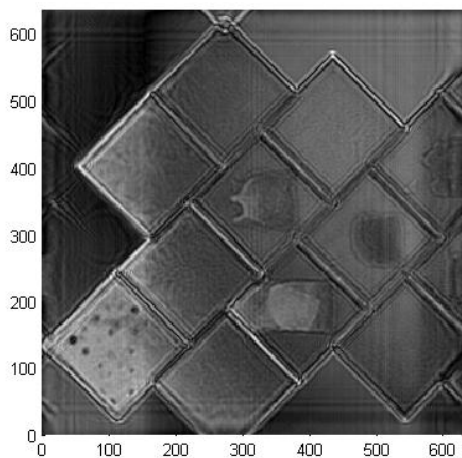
Millimeter wave image of corrosion specimen using wide-band holography at 33-50 GHz (dimensions in mm).
